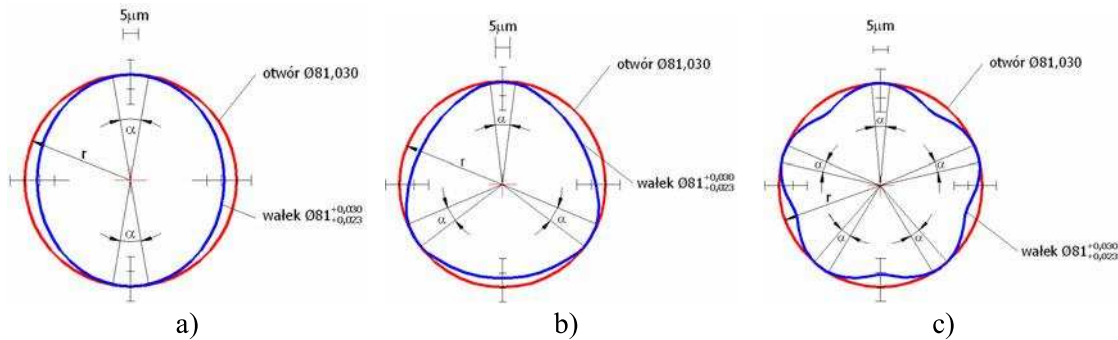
Samples of mating between an ideal hole $\phi 81,030$ mm and a real shaft $\phi 81^{+0,030}_{-0,023}$ of the pin joint H7/n6 in cross-section: a) oval shaft, b) tri-angular shaft, c) five-angular shaft
